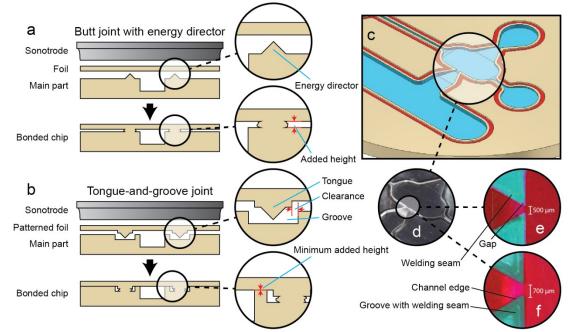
Sketches of two joint types for ultrasonic welding and presentation of chip systems with like joints. (a) Sketch of butt joint energy director pre and post welding. The energy director material results in an added channel height. (b) Sketch of a tongue-and-groove joint pre and post welding. The energy director material is contained within the groove resulting in no added height. (c) Sketch of the microfluidic main part of Design A2 showing the channel system (blue) and the groove (red). (d) Photograph of ultrasonically welded chip with the same channel system featuring a butt joint. The width of the capillary microvalve is 500 µm. Parts (e) and
